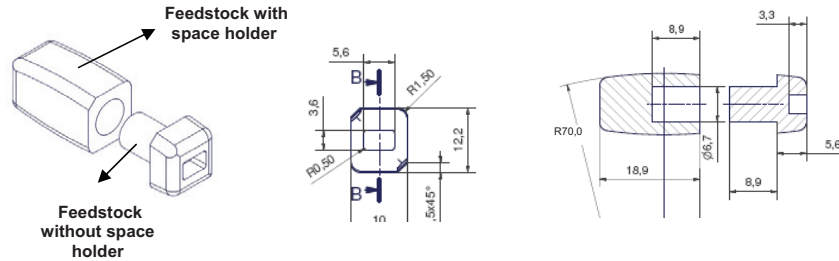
Technical drawing of a spinal implant composed of dense and porous parts for demonstration of the 2-C-MIM process.
